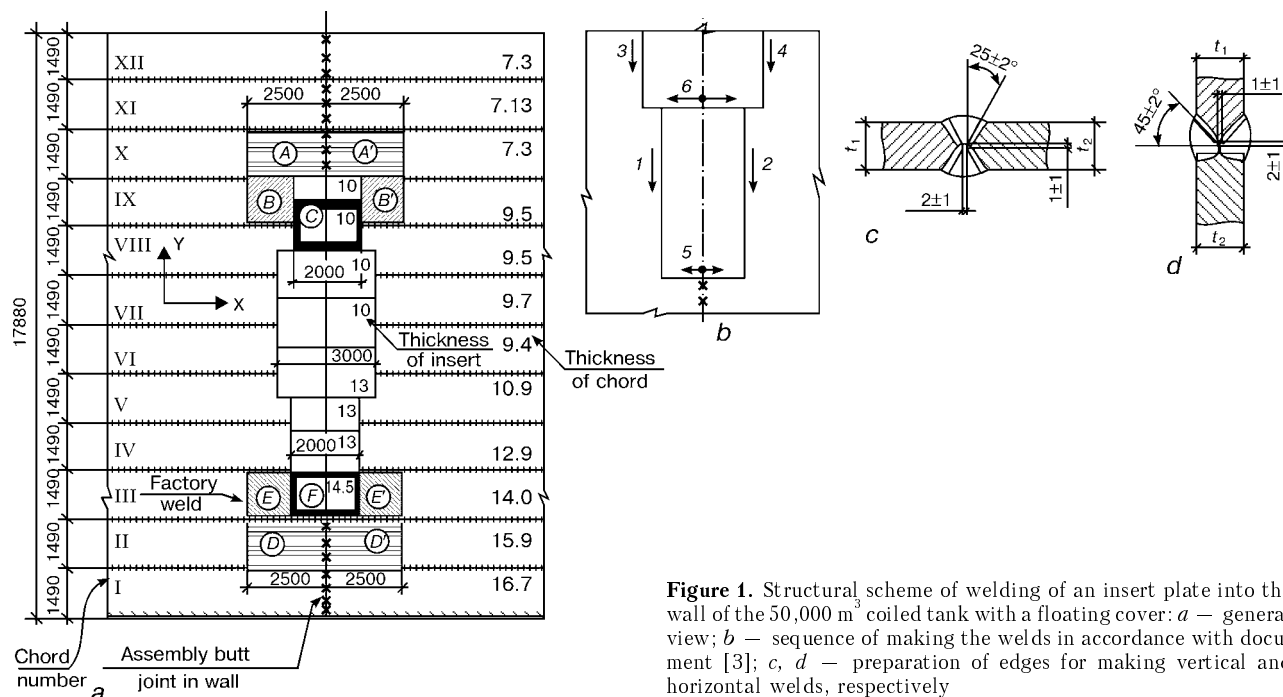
Structural scheme of welding of an insert plate into the wall of the 50,000 m³ coiled tank with a floating cover: *a* – general view; *b* – sequence of making the welds in accordance with document [3]; *c, d* – preparation of edges for making vertical and horizontal welds, respectively
